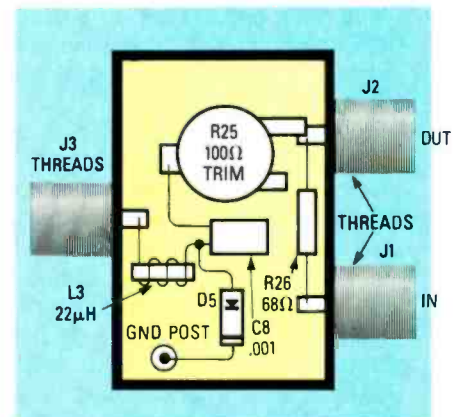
THE ATTENUATOR is built in a gutted splitter. The assembly will be simplified if you follow this parts layout.
